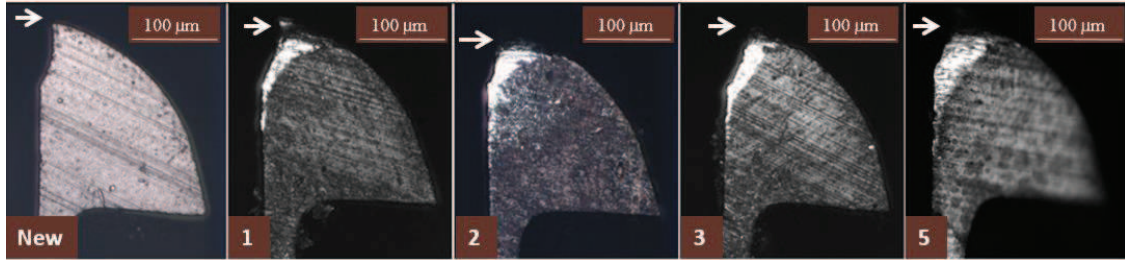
Bottom edge wear for dry test under machining conditions 1,2,3, and 5.
